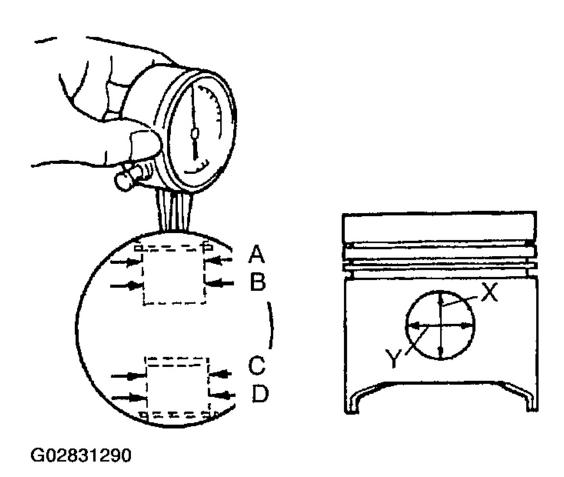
Measuring Piston Pin Bore Diameter Courtesy of MAZDA MOTORS CORP.
